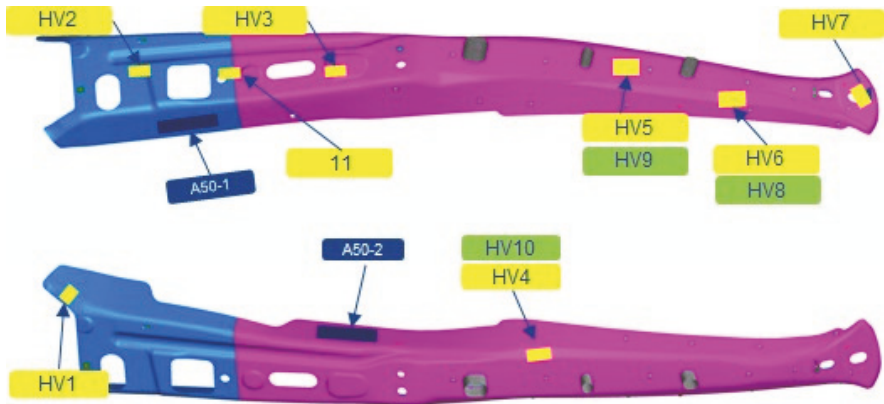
Mechanical properties of hot stamped parts testing and sampling location
